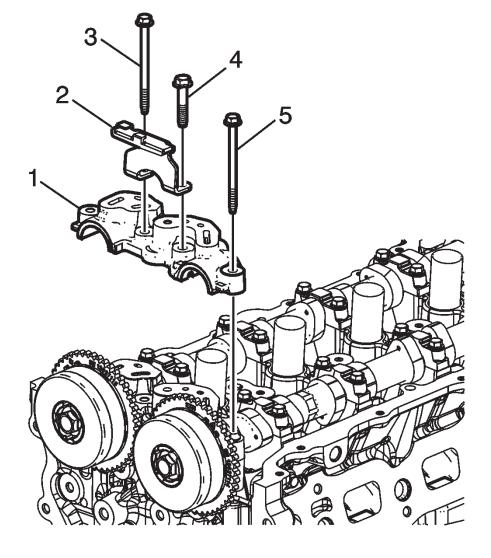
Front Camshaft Bearing Cap Courtesy of GENERAL MOTORS COMPANY
